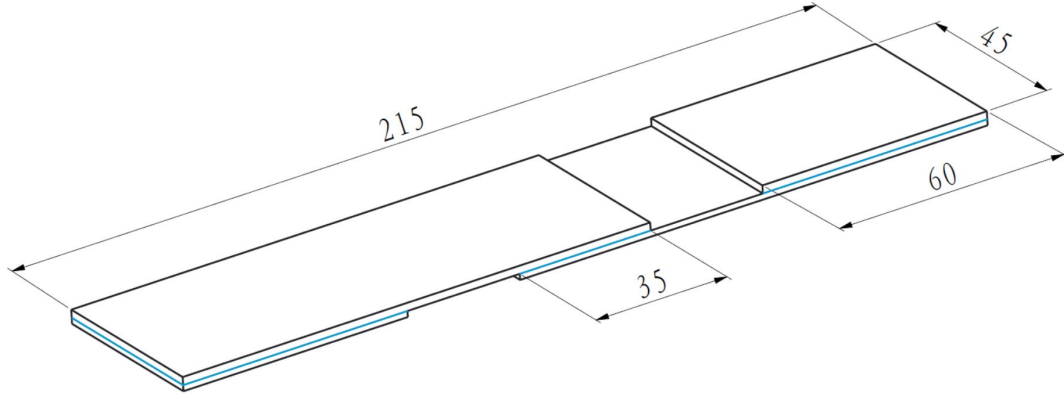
Tensile shear specimen. All dimensions are in mm.
